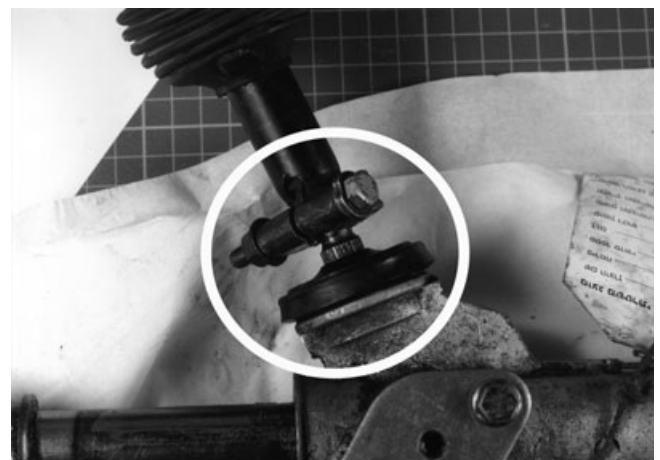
Photograph of wheel system (upper view). The steering system is assembled incorrectly with the bolt screwed only at the tip of the rack and pinion.
